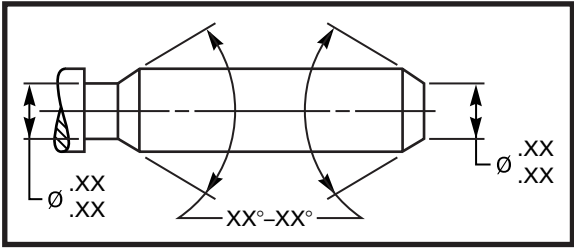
SPECIFYING EXTERNAL CHAMFER FOR ROLLED THREAD BLANKS
